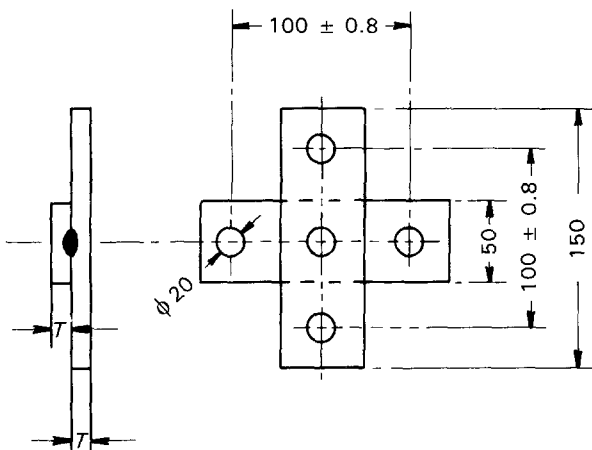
The shape and dimensions of the cross-tension test piece. The lengths are in millimetres.
